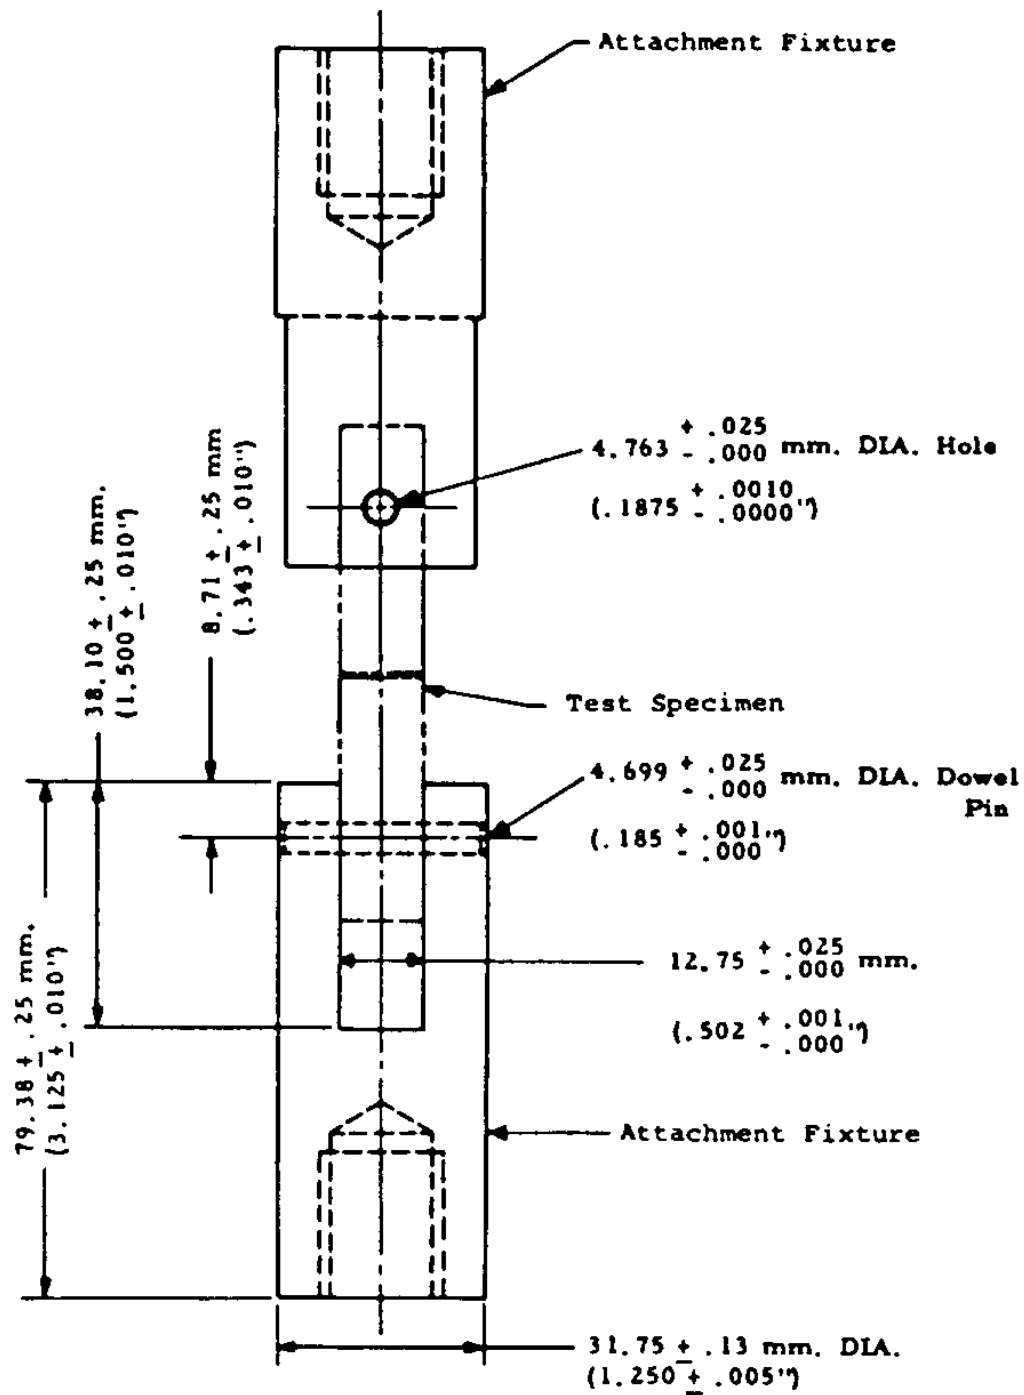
(d) The ASTM D 2095 loading fixture.
